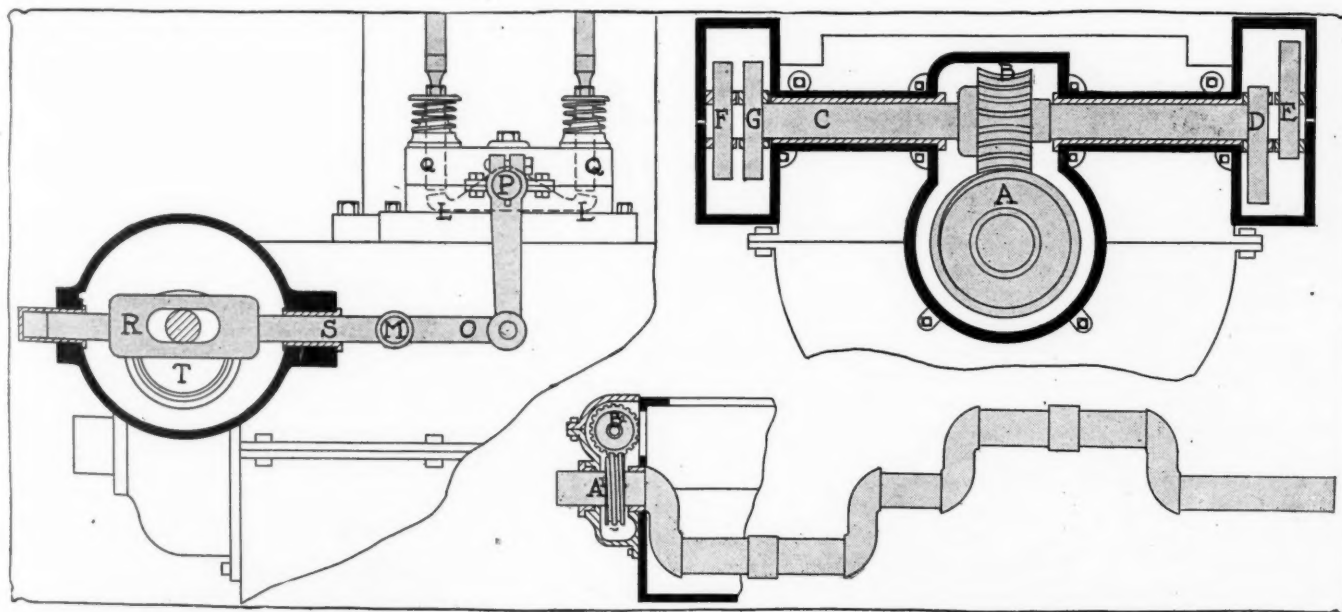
Worm-driven valve action designed to silence motor. Three views are shown, end, rear and front
